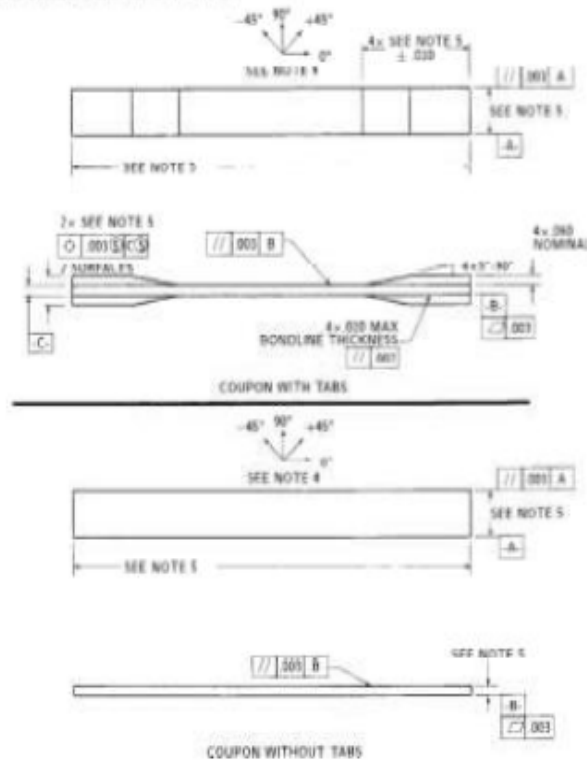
Tension Test Specimen Drawing (inch-pound)
